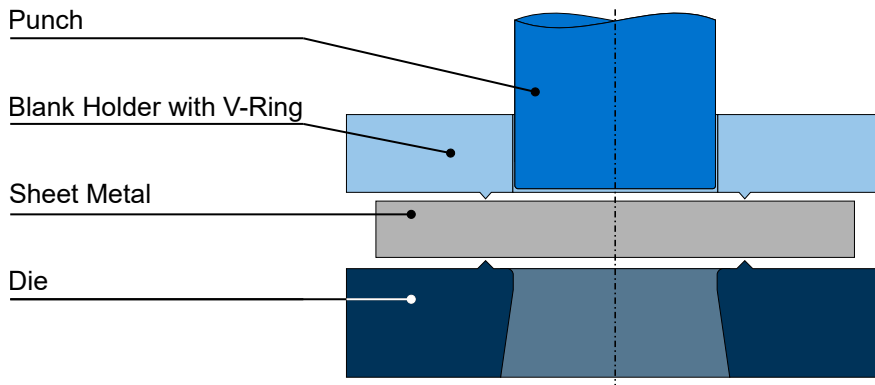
Tool setup of blanking with small die clearance and v-ring after Hörmann, 2008.
